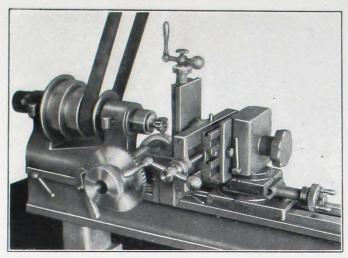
Tail end view of Milling Attachment set to mill teeth in a Milling Cutter.
